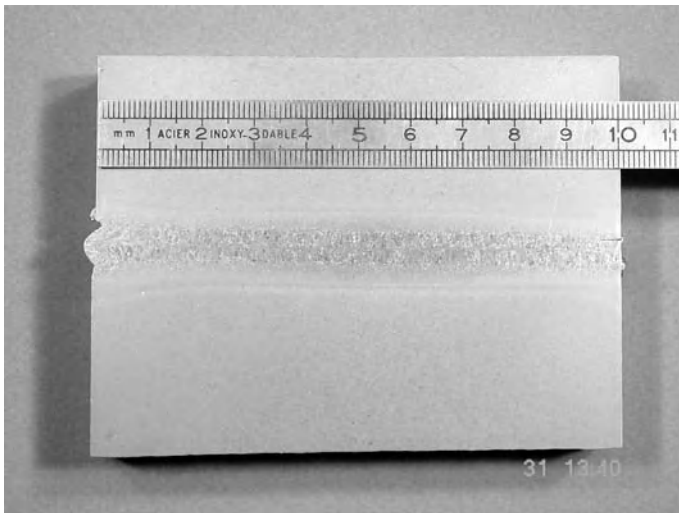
Electron beam weld of 100 mm thick titanium alloy TA5E (Institut de Soudure document)
